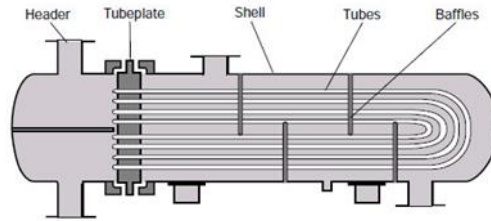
U-TUBE SHELL & TUBE HEAT EXCHANGER
